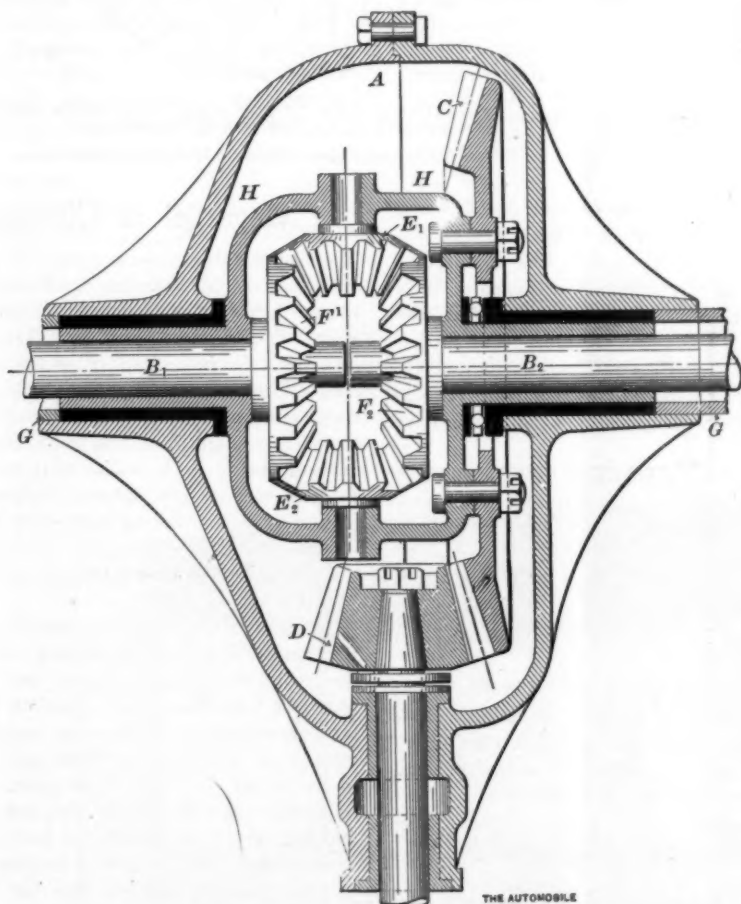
PLAN VIEW PARTLY IN SECTION OF BEVEL GEAR DIFFERENTIAL.
